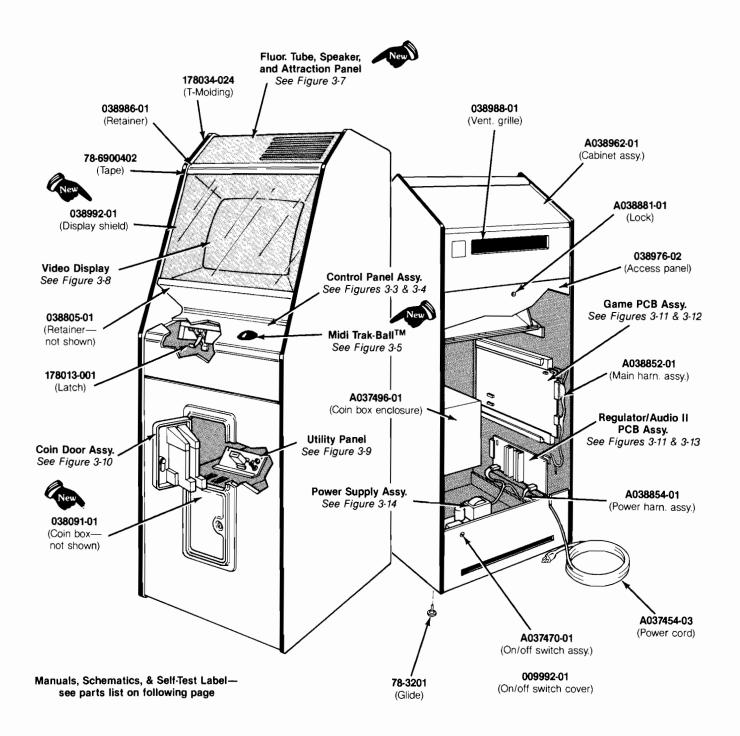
Cabinet-Mounted Assemblies Ireland-Built Cabinet A038961-01 & -02 A
